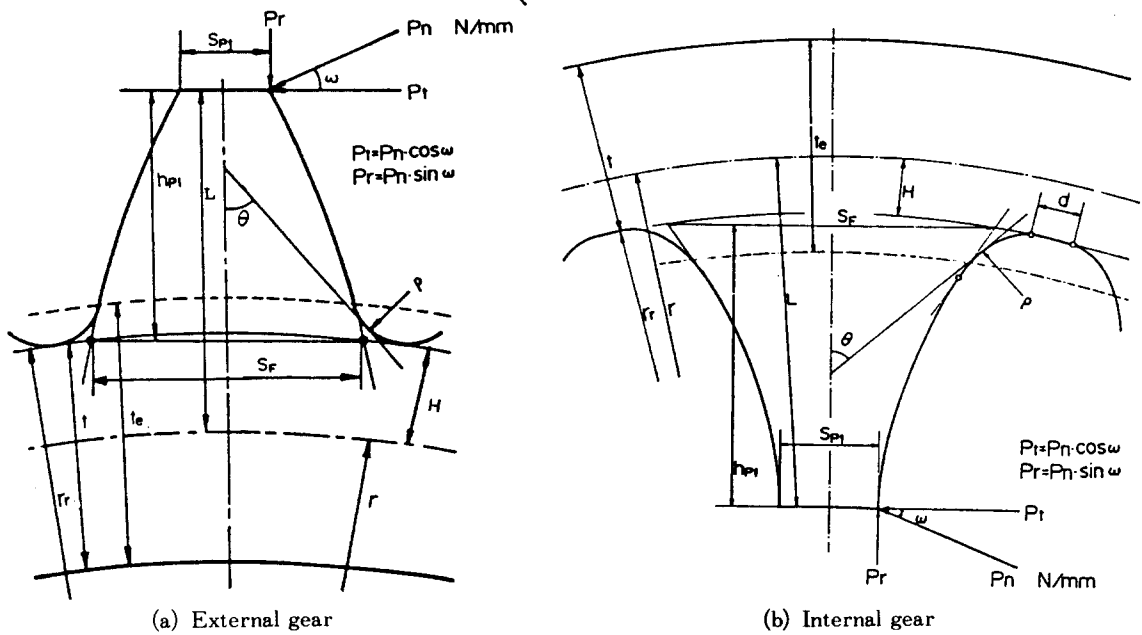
Notations to show dimensions of tooth and rim of thin-rimmed spur gears and a loading condition for calculating tooth fillet and root stresses.
